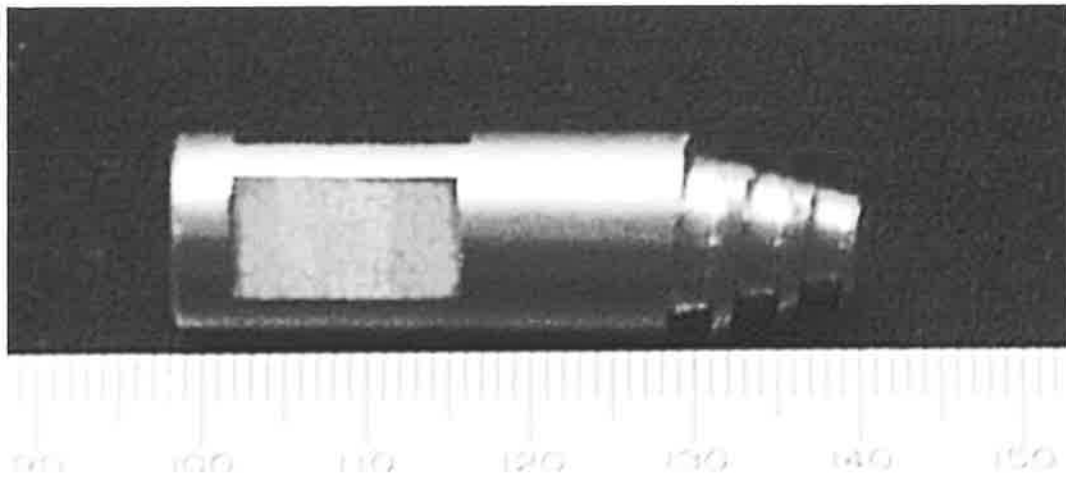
Pin CT2-14 = Conical threaded pin with three flats.
